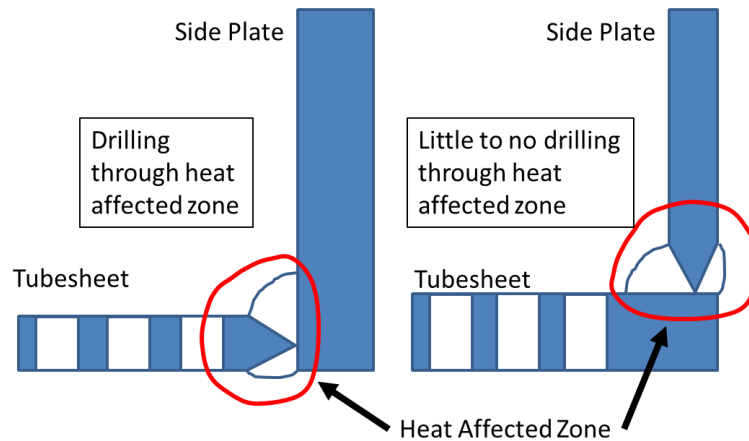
Welding related manufacturing constraints (Beyers *et al.*, 2015)
